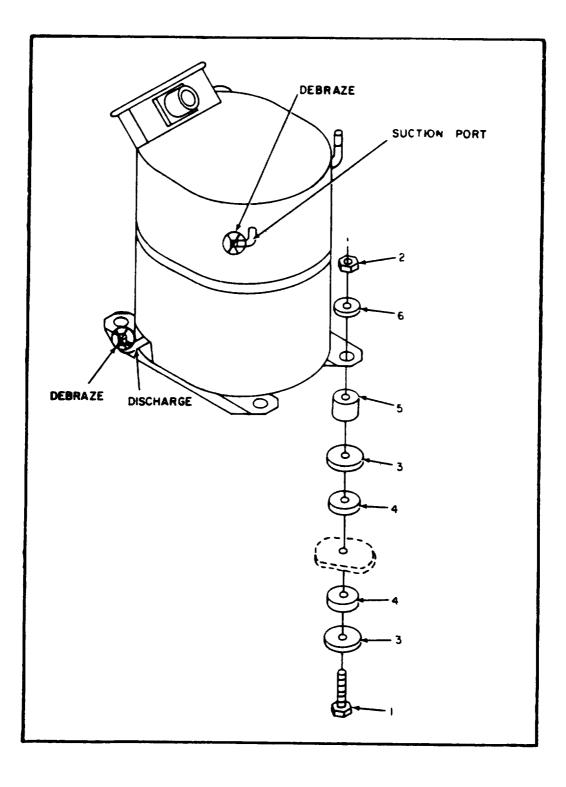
Recommended Debraze/Brazing Locations and Compressor Removal/Instllation.
